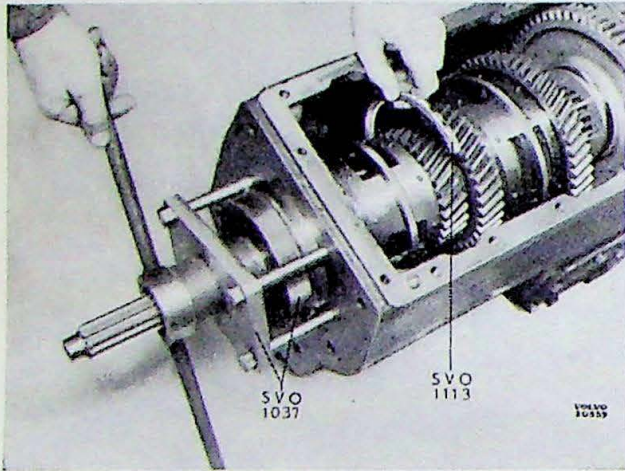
37. Fitting the bearing on the main drive pinion, K 13.
